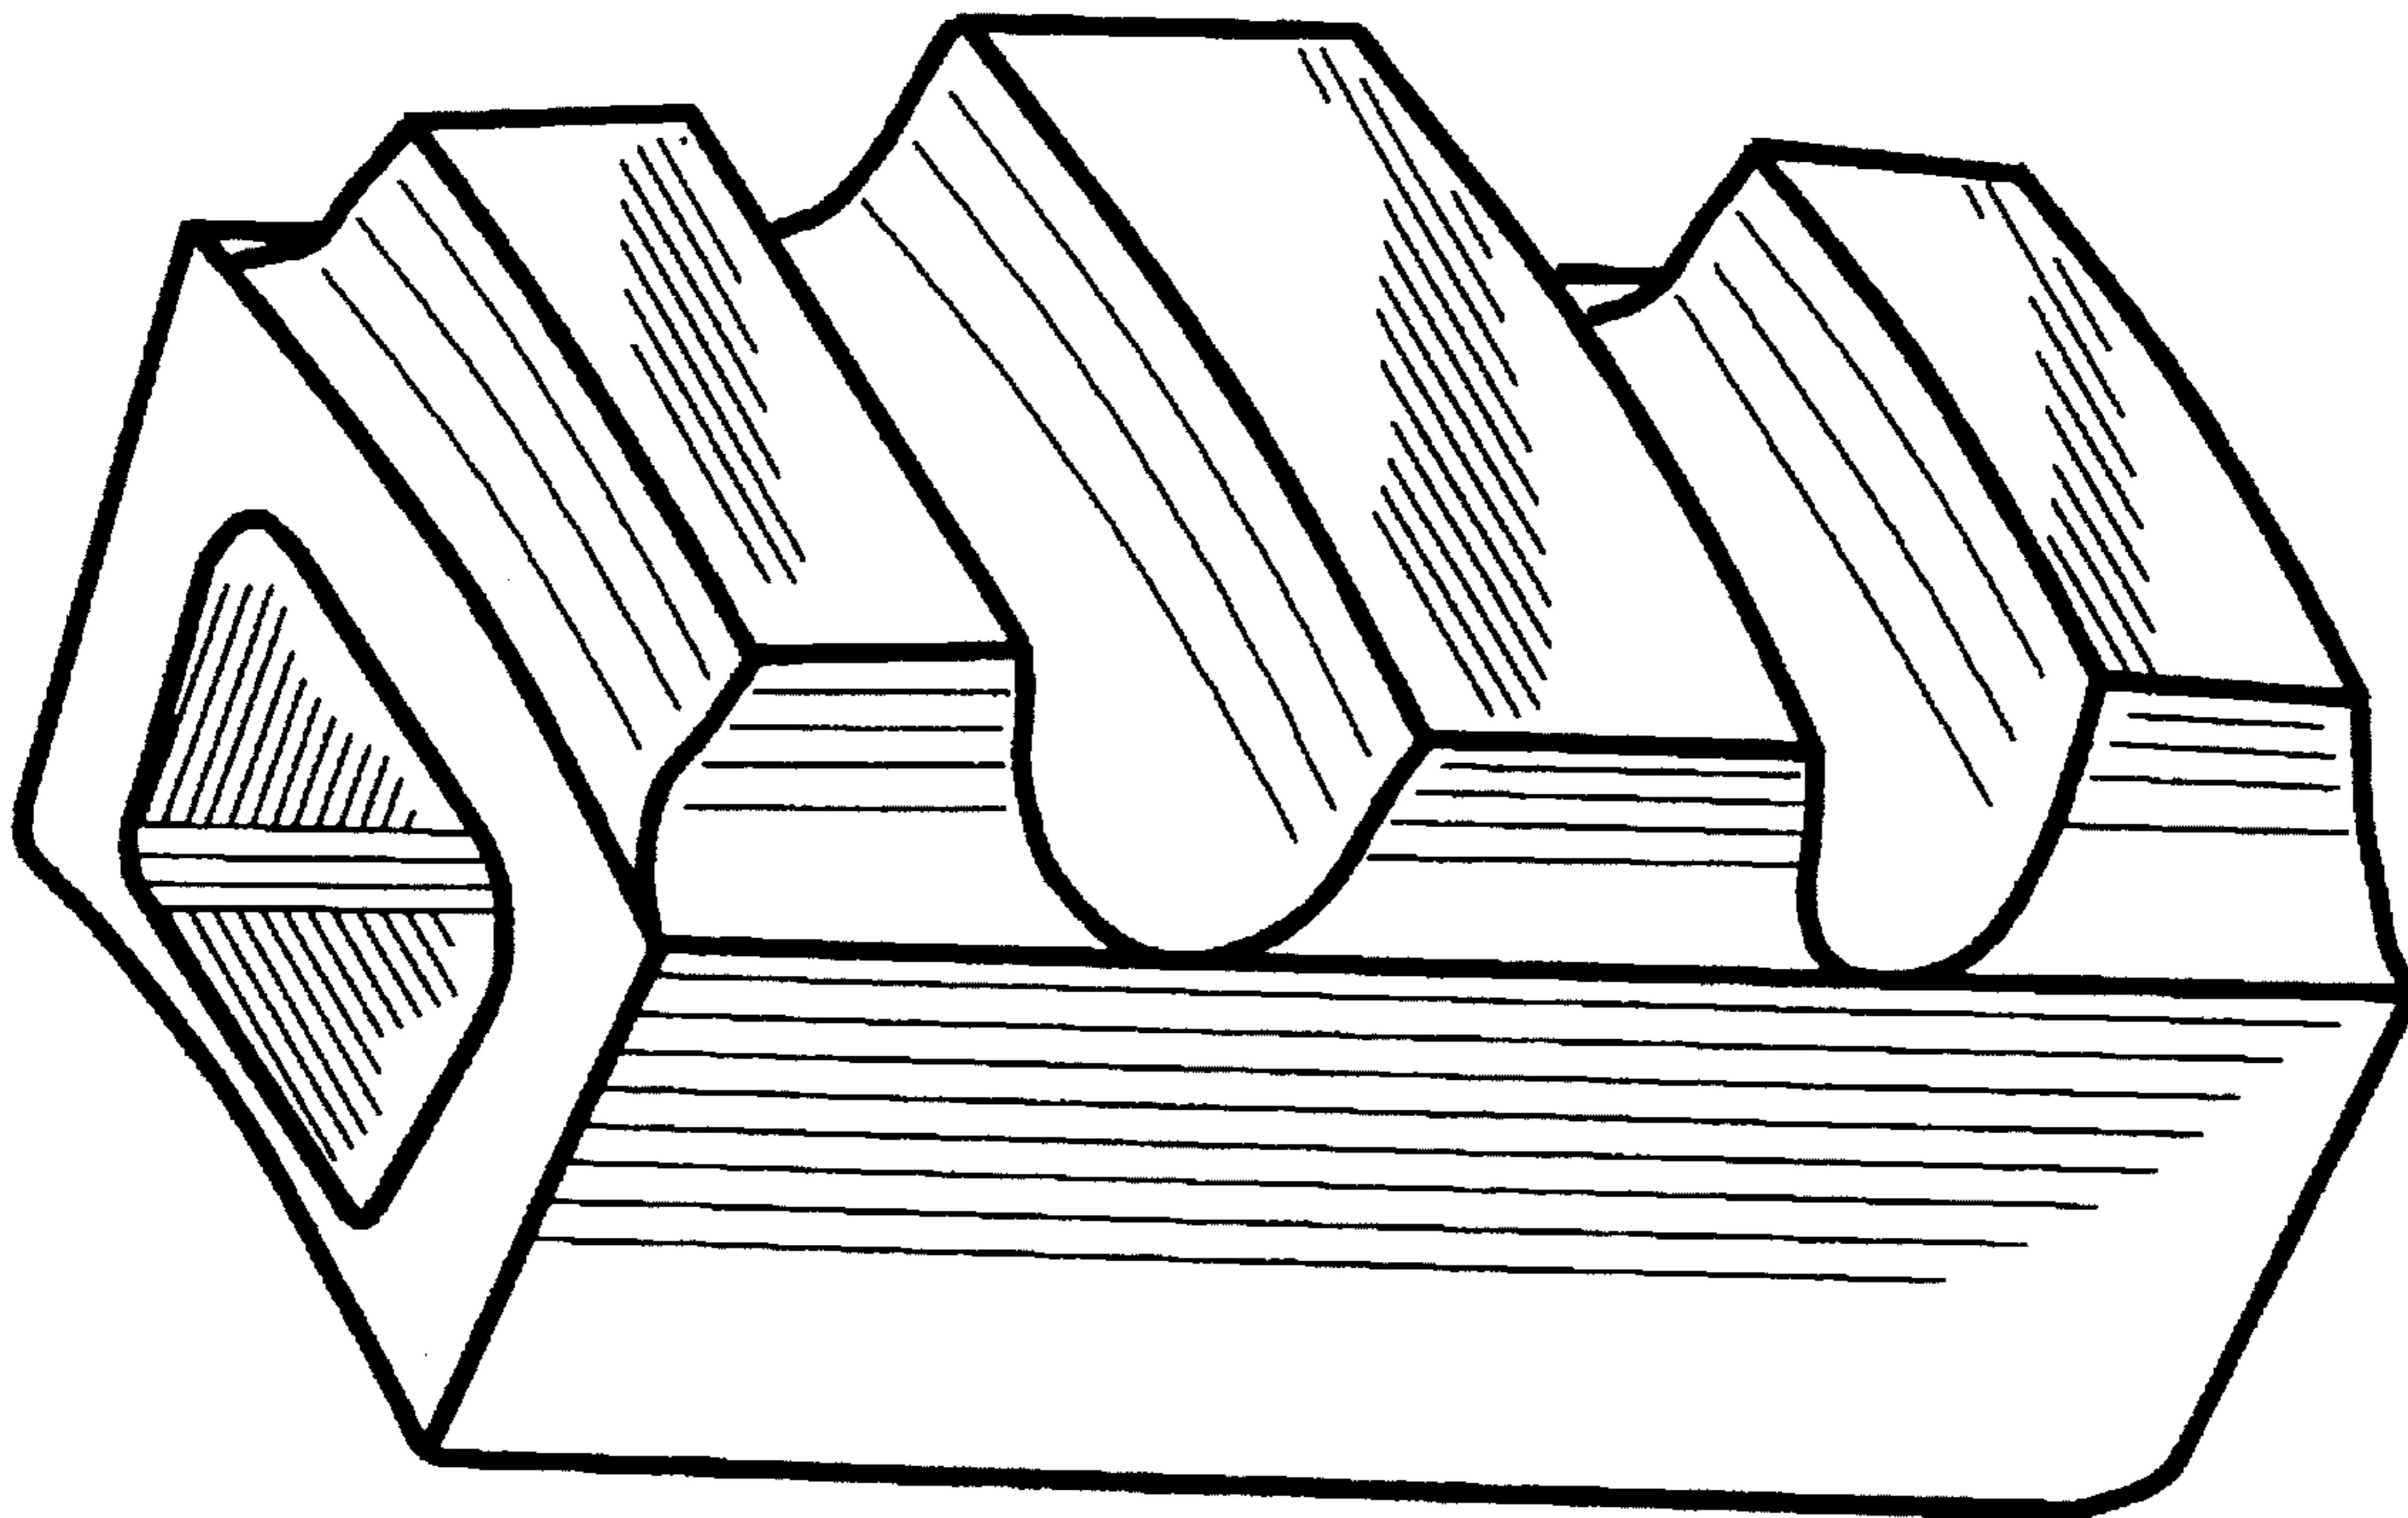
is a top perspective view of a tread element for wheel or endless track, showing my new design;
